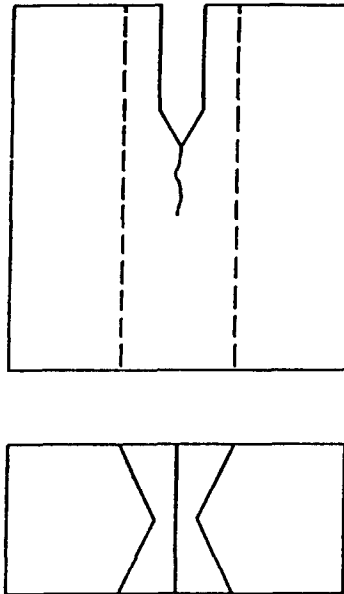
Orientation of cracks in welded plate specimens.
